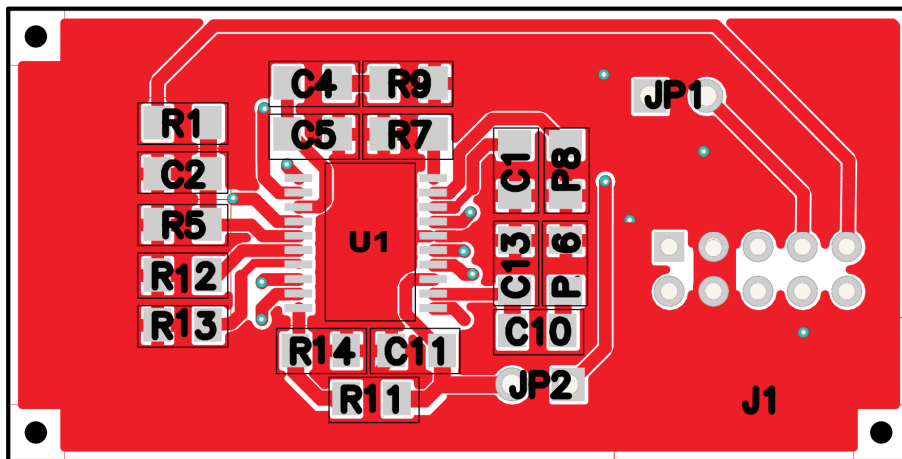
Daughterboard of UCC28070 top assembly [28]. Reprinted with permission.
